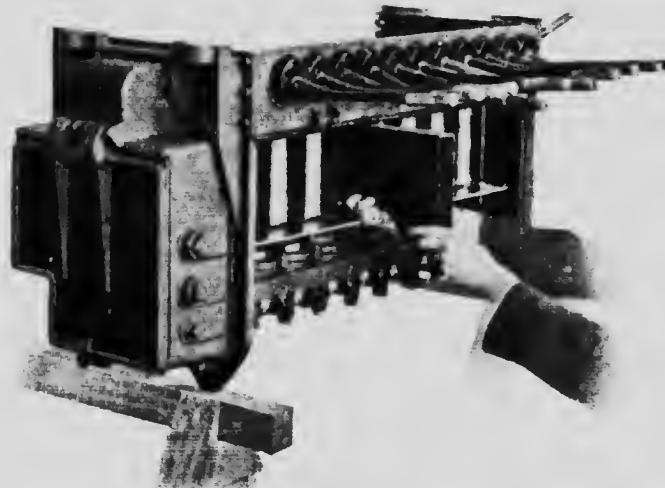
Westinghouse Switch and Contact Assembly.
